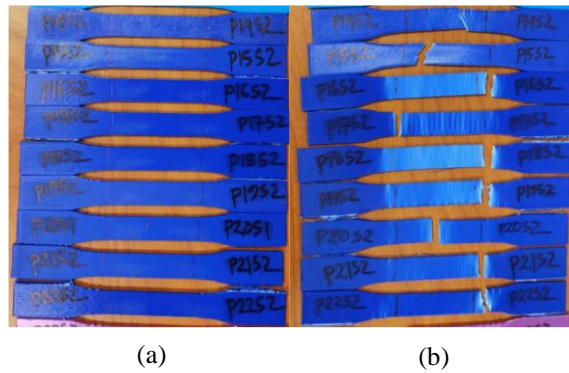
Specimens prior to (a) and post (b) tensile testing
